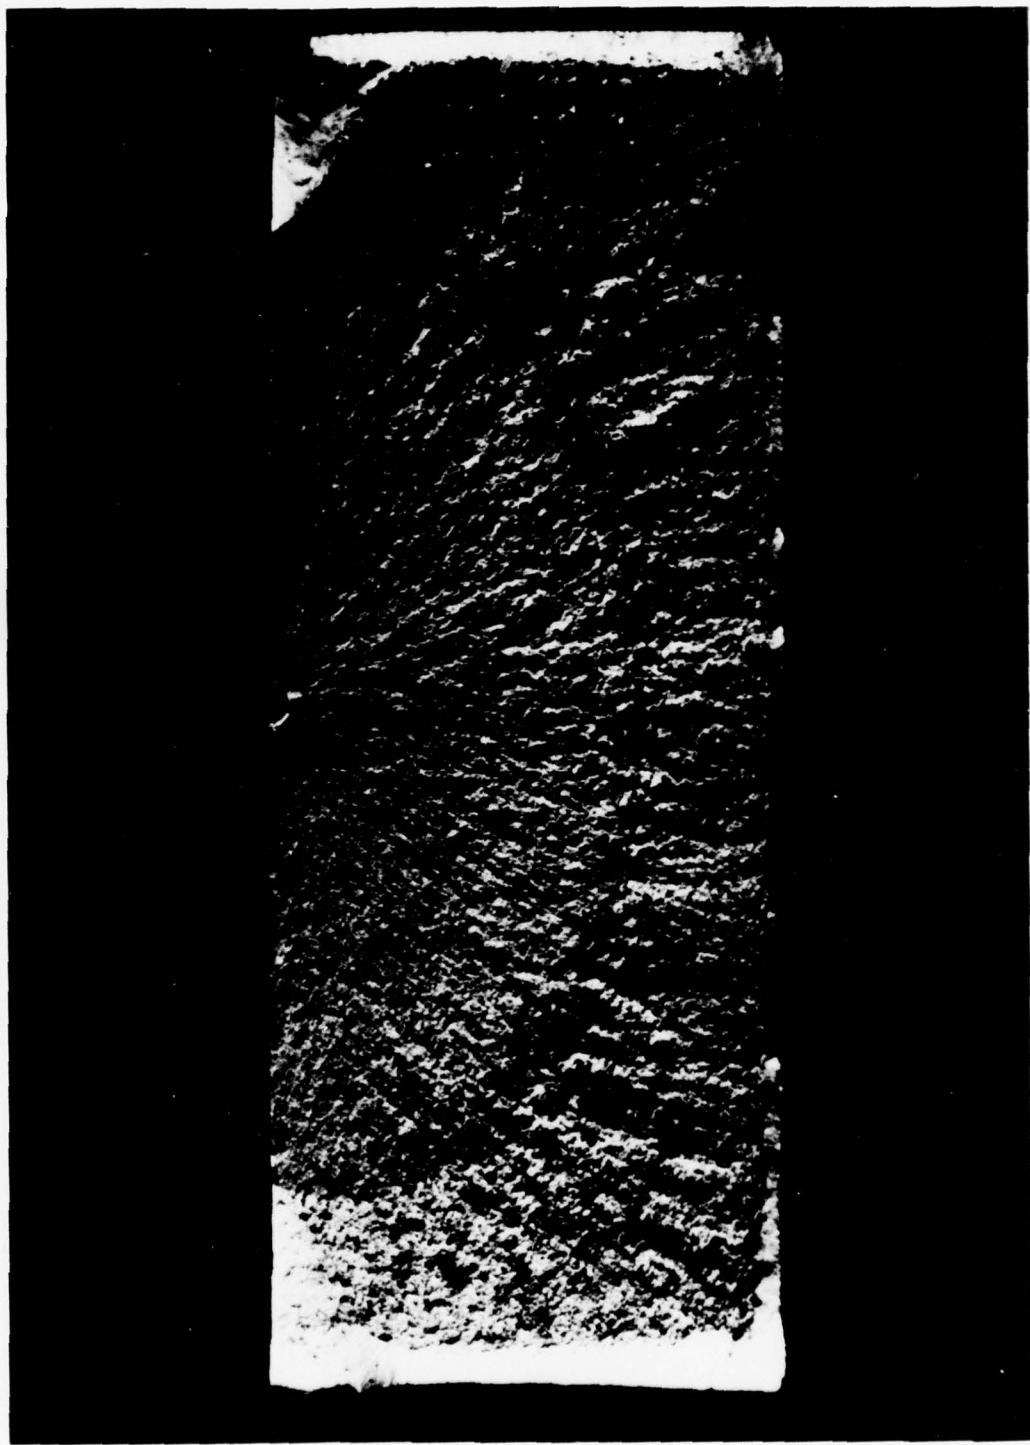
Macrofractograph for 1200°F Surface Flaw Specimen
